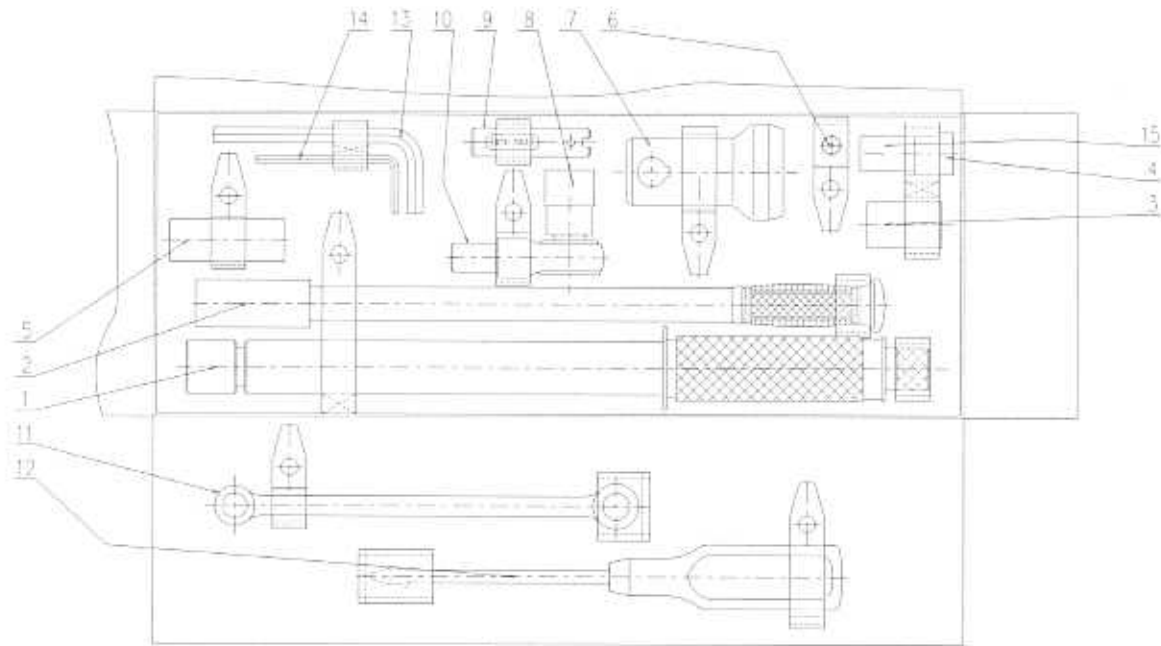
Assembly tools for the V 503AP propeller Bag for set "A"
